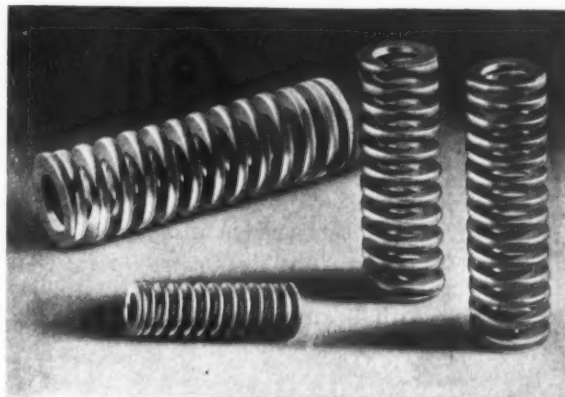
Danly Die Springs of Rectangular Cross-section after being Coiled
